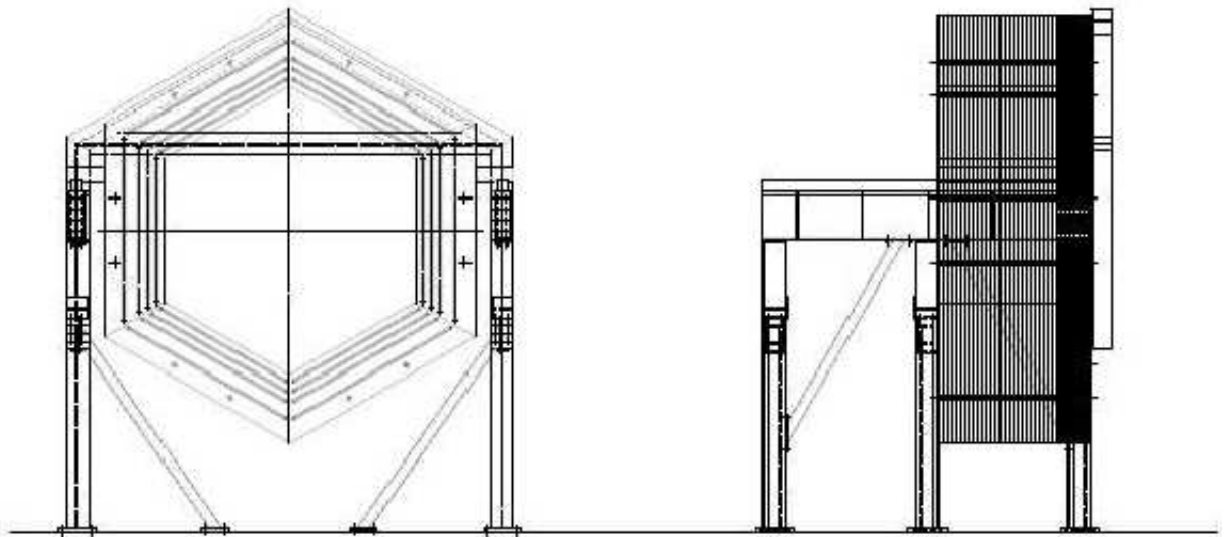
Engineer's drawing showing front and side view of the MINERνA detector stand.
